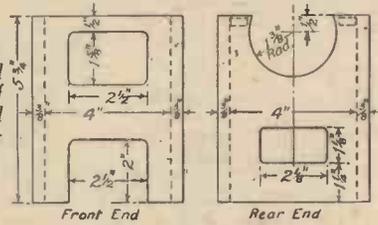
(left) and Fig. 7.—Details of the side plate and ends for the boiler casing.
